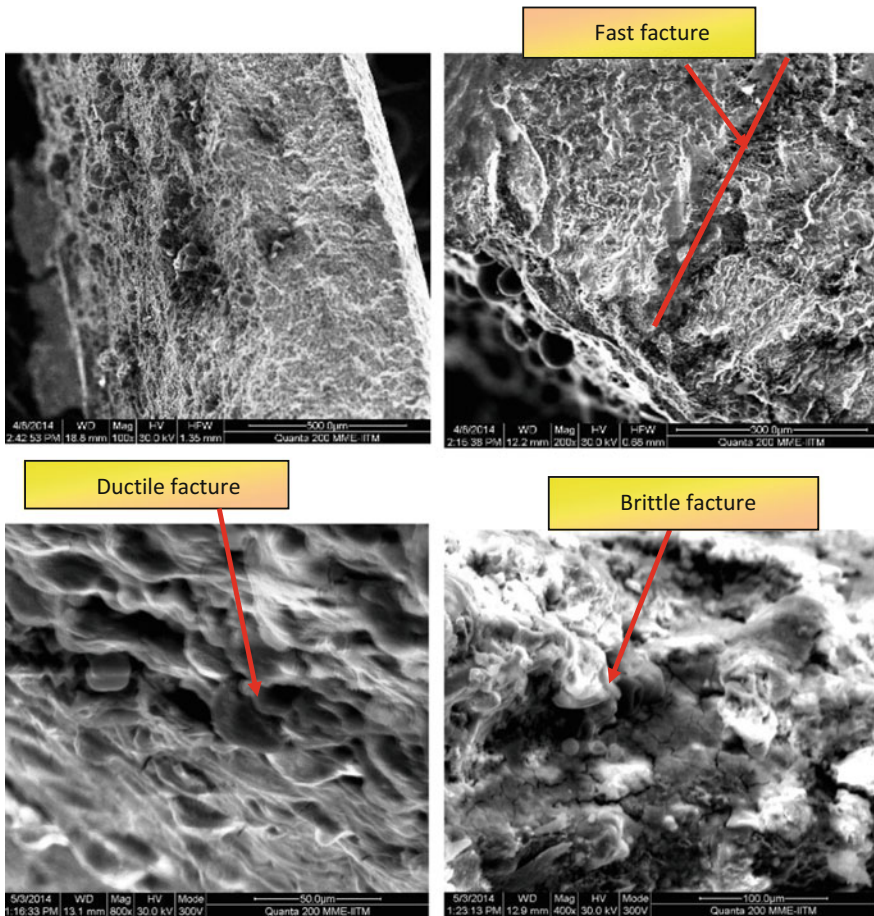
a–d SEM image of fracture surface of specimen in hydrostatic fatigue test
